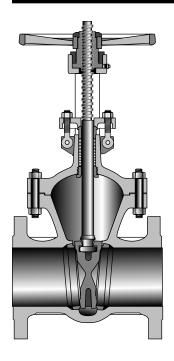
Flanged Figure 76½ Butt Weld
